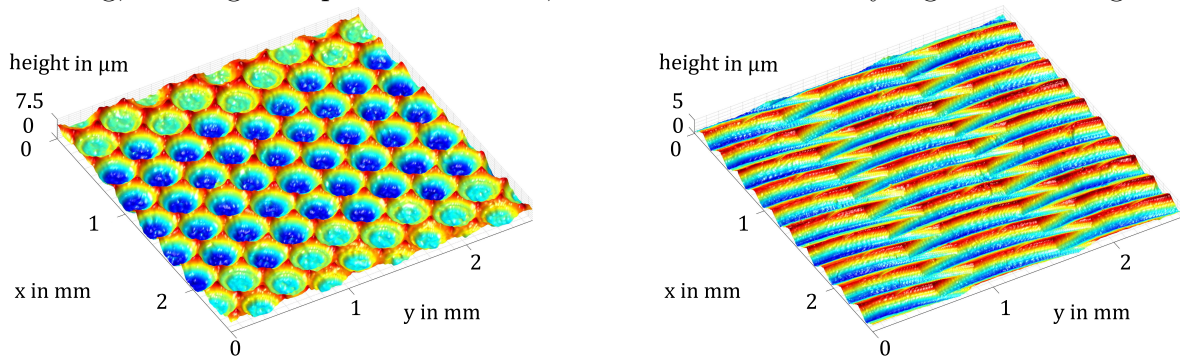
Surface produced by micromilling    Figure 2: Surface produced by high-feed milling
